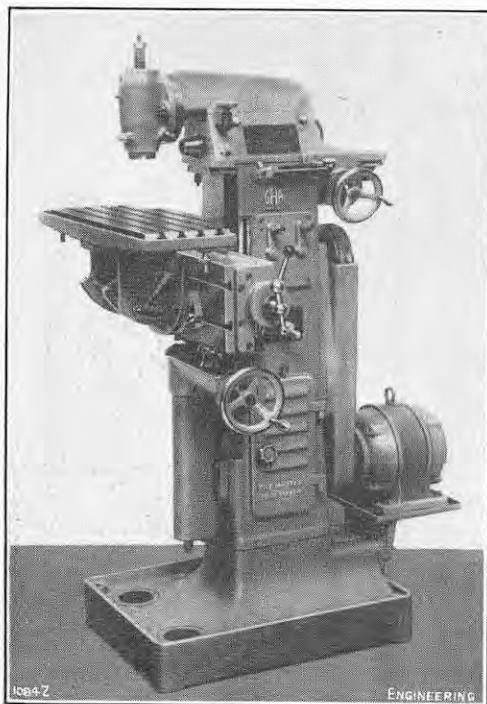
UNIVERSAL MILLING MACHINE; GEORGE H. ALEXANDER MACHINERY, LTD.
